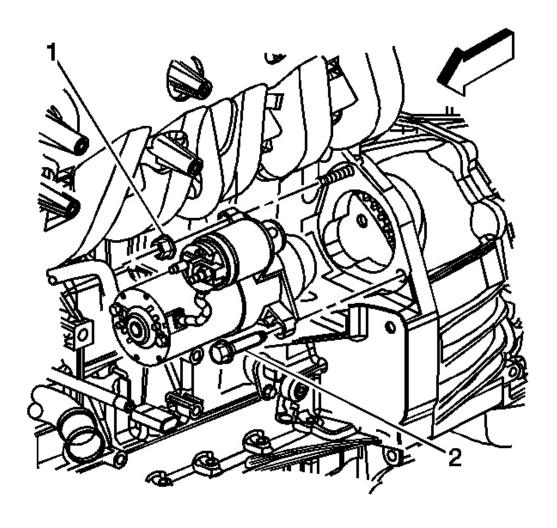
View Of Starter Mount Bolt & Nut Courtesy of GENERAL MOTORS CORP.
